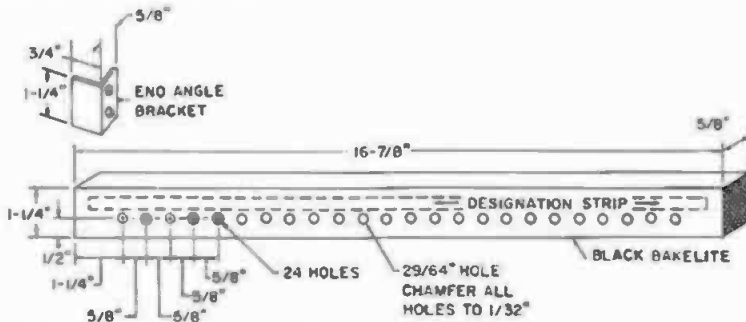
A. Drilling dimensions for a single jack row mounting strip and for the mounting bracket.
